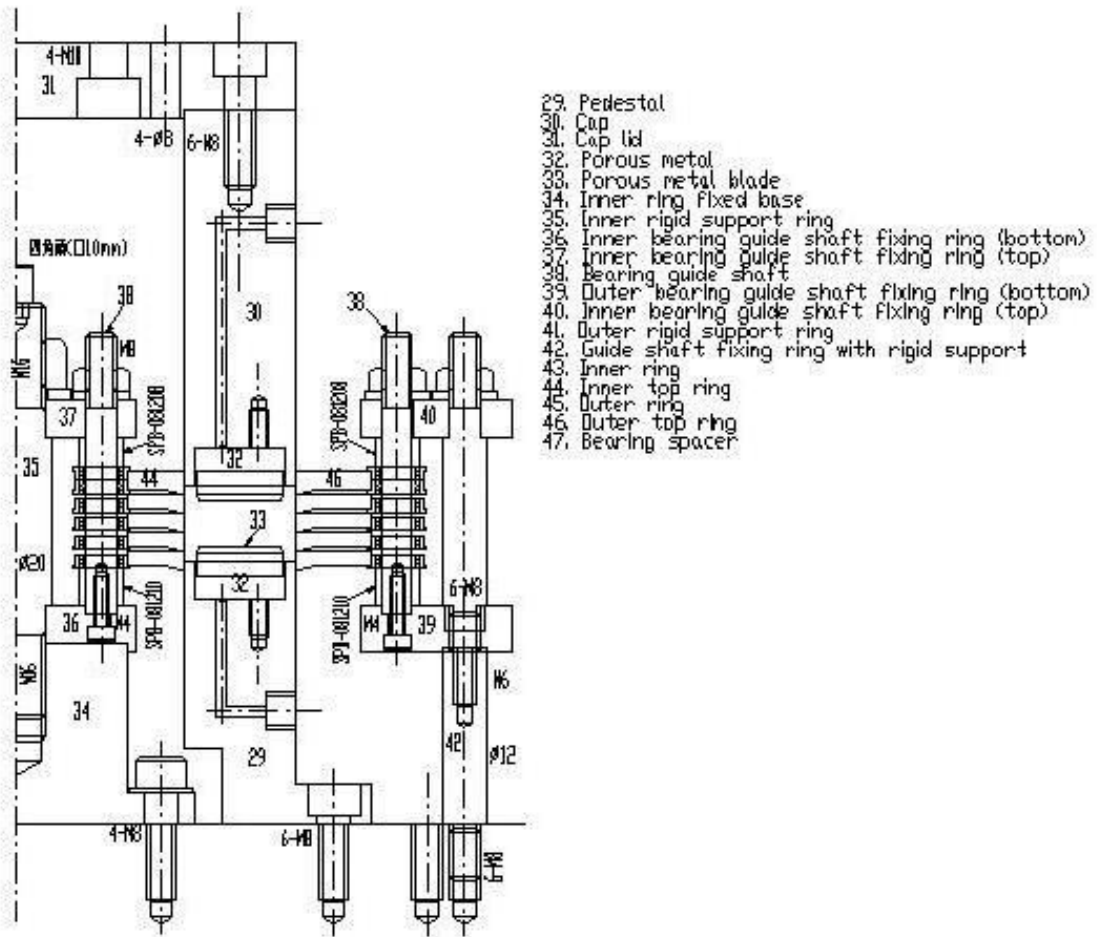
Schematic figure of 5 stacked-ring shear type
